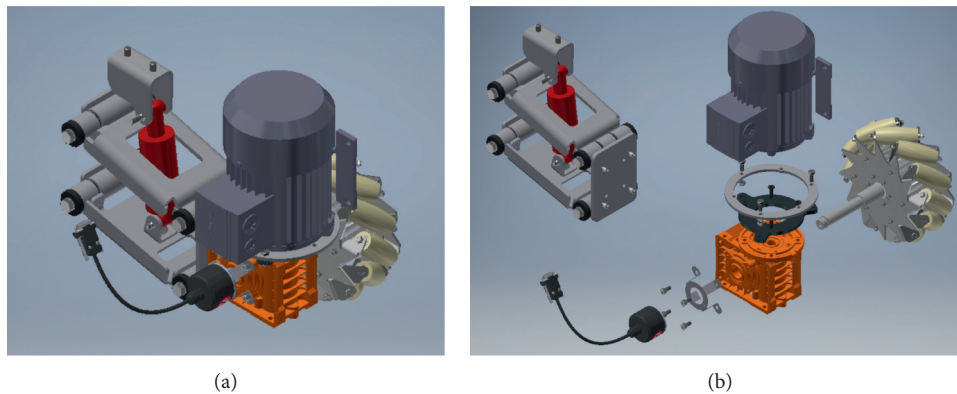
(a) Isometric and (b) exploded view of the suspension system including the three-phase motor, mecanum wheel, and encoder assembly.
